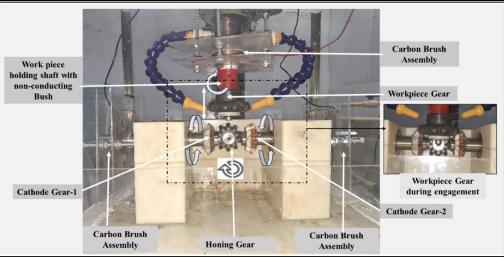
Photograph of the finishing chamber, depicting the arrangement of the workpiece straight bevel gear, two paired matching cathode gears, and the HG
